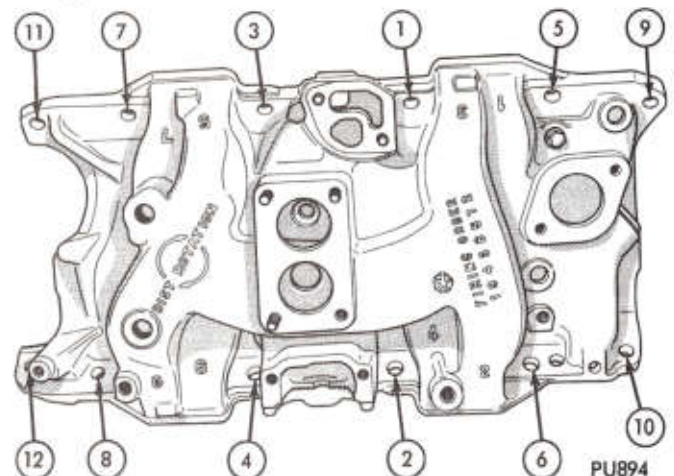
Intake Manifold 318 (5.2L) and 360 (5.9L) Engines (Typical)
